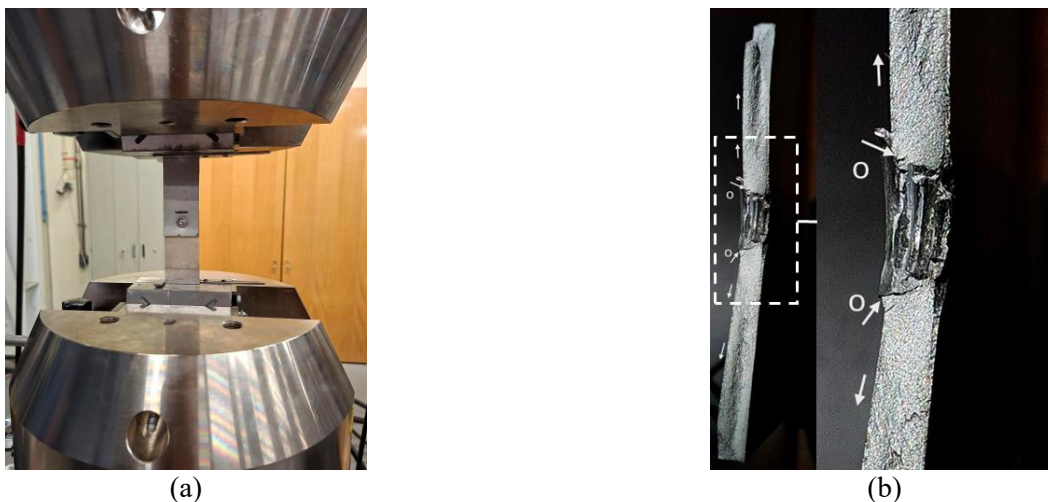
FDS single lap joint tests under cyclic loading: (a) Experimental Setup; (b) Fatigue fracture surface
